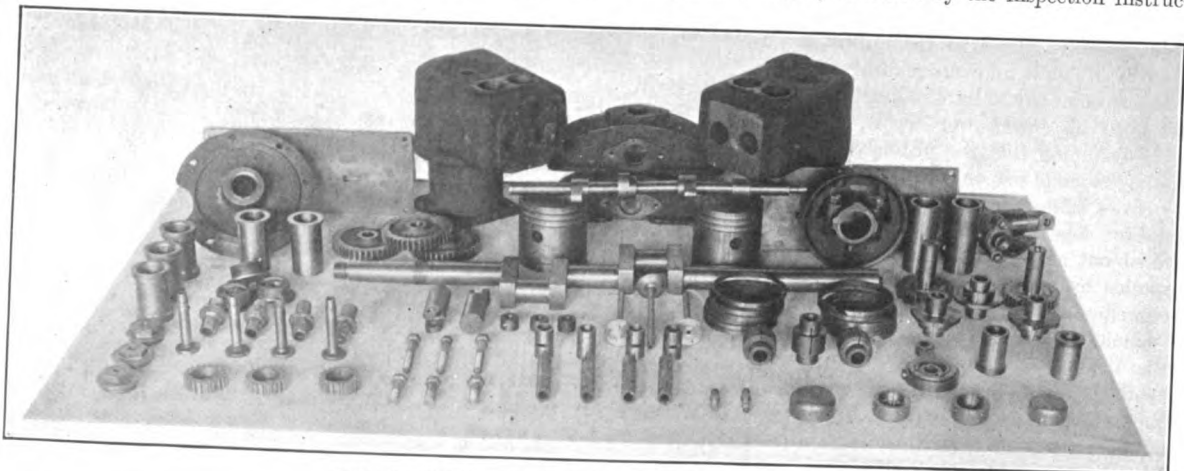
TYPICAL SET OF PARTS FOR INSPECTION
